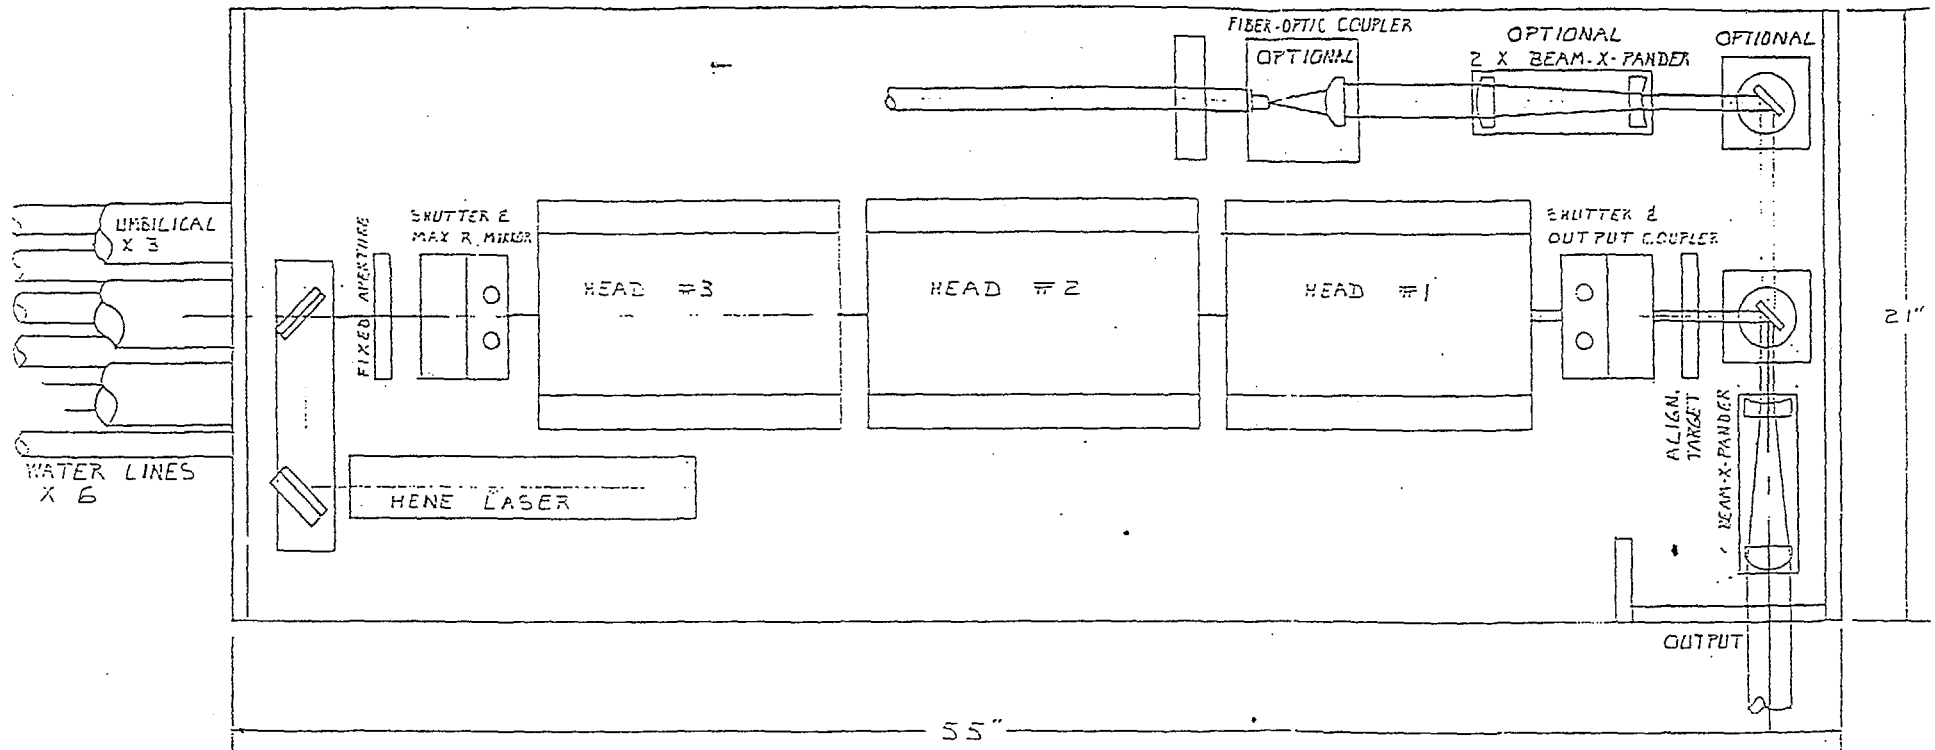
Optical assembly of the 800w CW Nd-Yag Laser.
